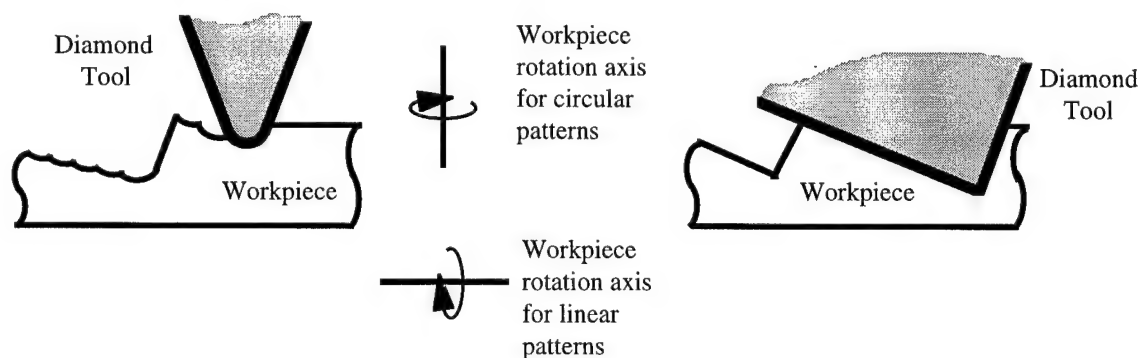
Cross-sectional view of diamond turning configurations. (Left) In single-point turning, a diamond tool with a radius tip is translated incrementally to cut the desired profile as the workpiece spins. The shape of the tool tip can be seen in the turned workpiece as surface scalloping. (Right) In wedge-tool diamond turning, the workpiece is rotated as for single-point diamond turning, but the translation steps of the tool cover the full groove, and the edge of the diamond is used to cut the workpiece.
